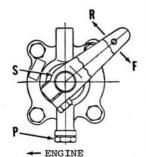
install shifter assembly in case with plug (P) pointing down. Position shift lever (S) on shaft at a 45 degree angle checking that there is an equal amount of travel in both forward (F) and reverse (R) directions.
